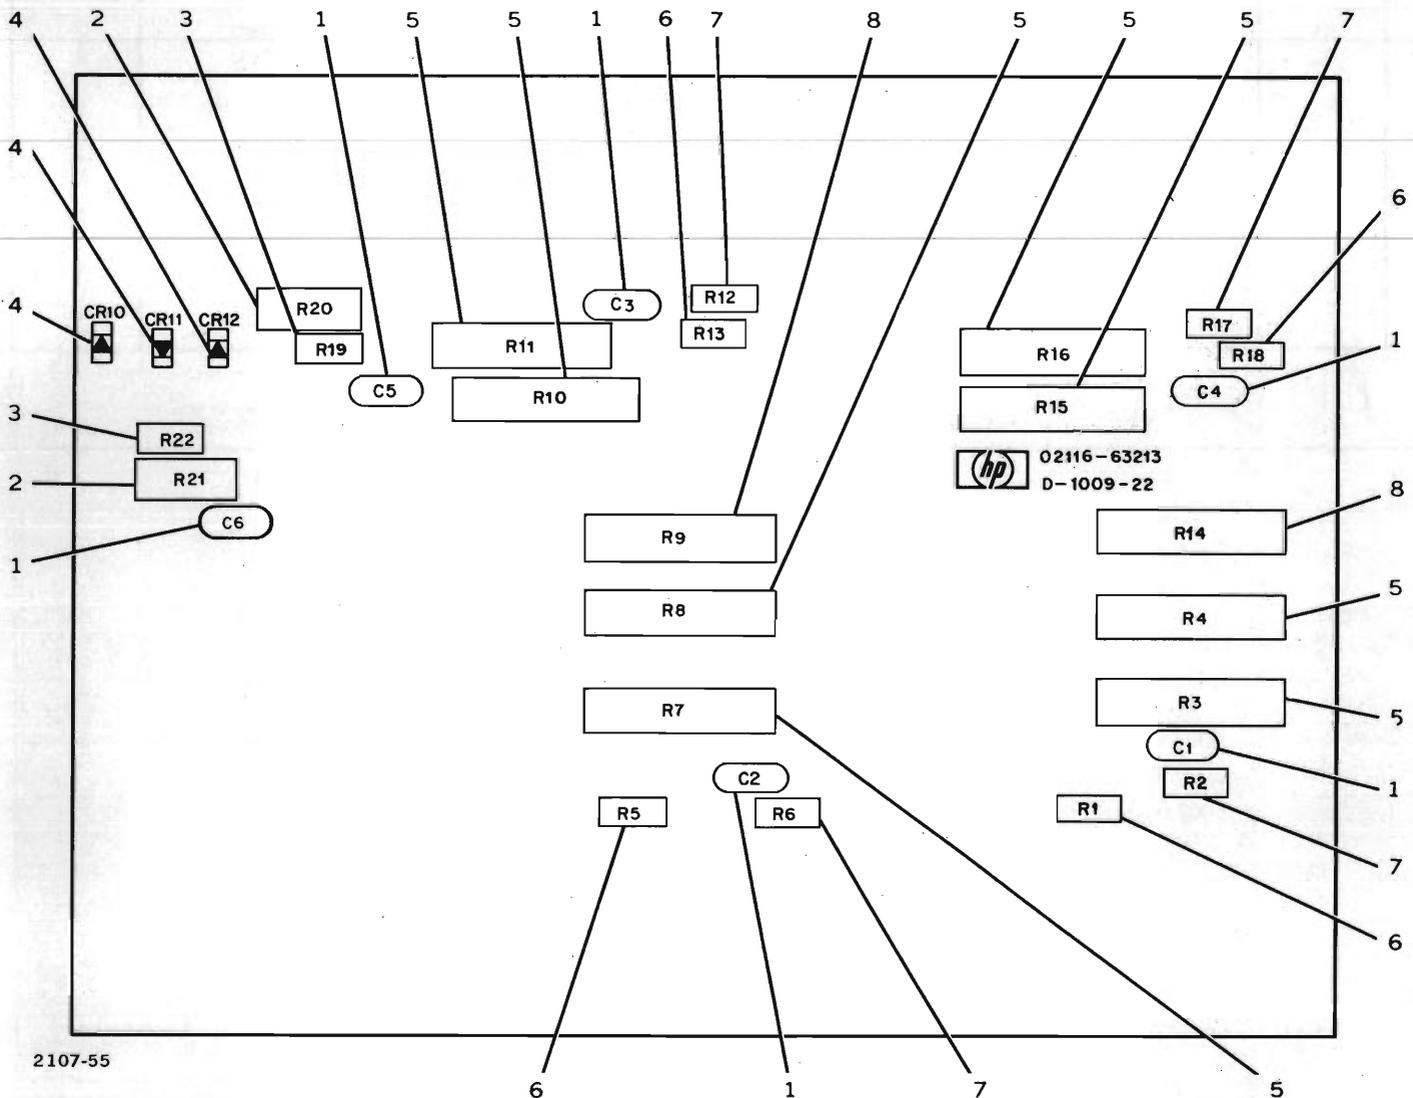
A121A1 Overvoltage Component Board Assembly (02116-63213), Replaceable Parts
